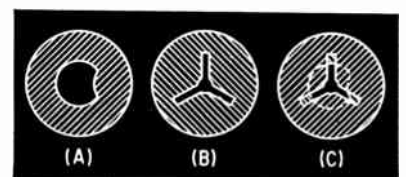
Image of hole and pin (A) is projected on mask (B) to obtain a-c when the piece rotates (C)
